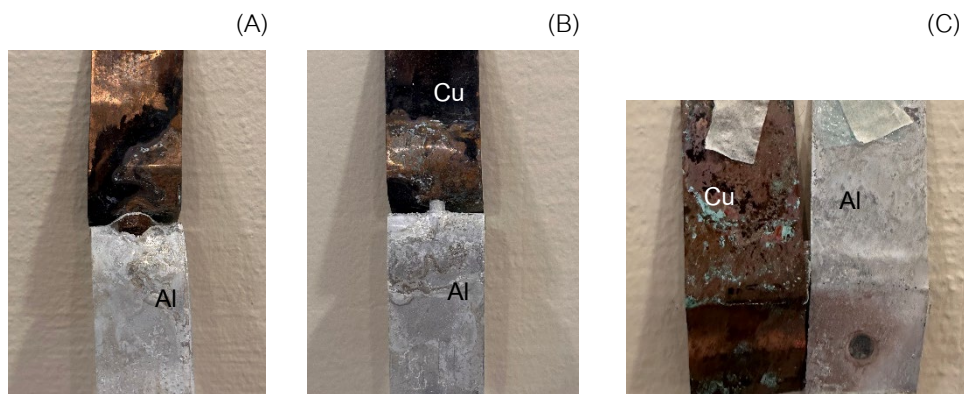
Failure modes observation of specimens which connected by (A) steel bolt, (B) steel rivet, (C) resistance spot weld
